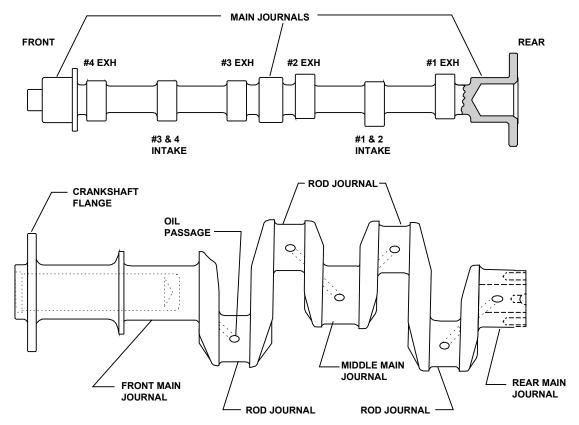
O200/IO-240 Crankshaft & Camshaft
